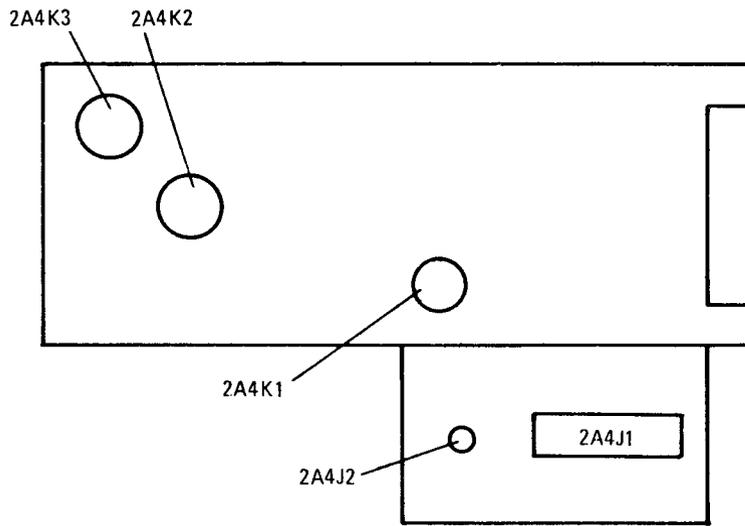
Capacitive RF Tuner Assembly 2A4 Component Locations
